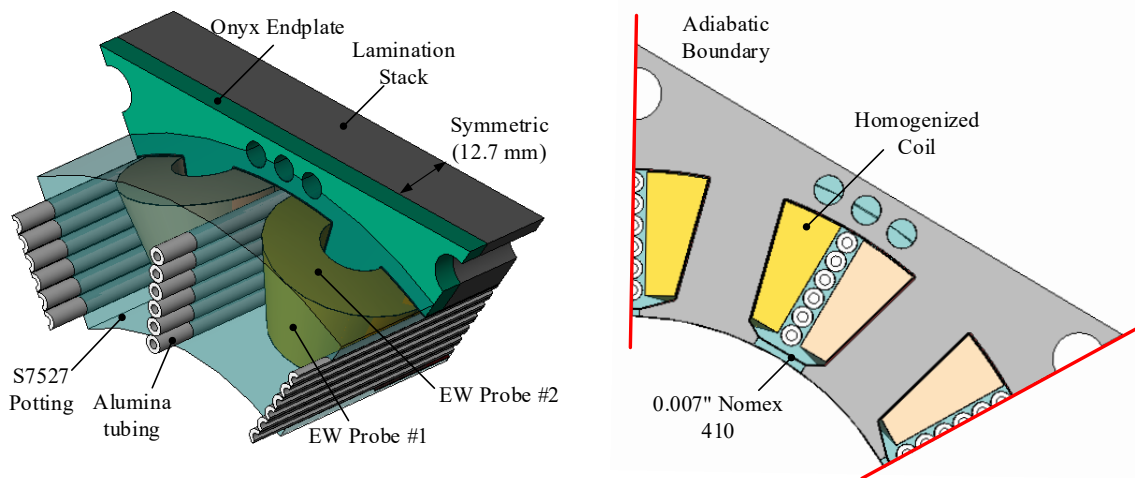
Steady stator model used in the thermal analysis for the developed demonstrator machine.
